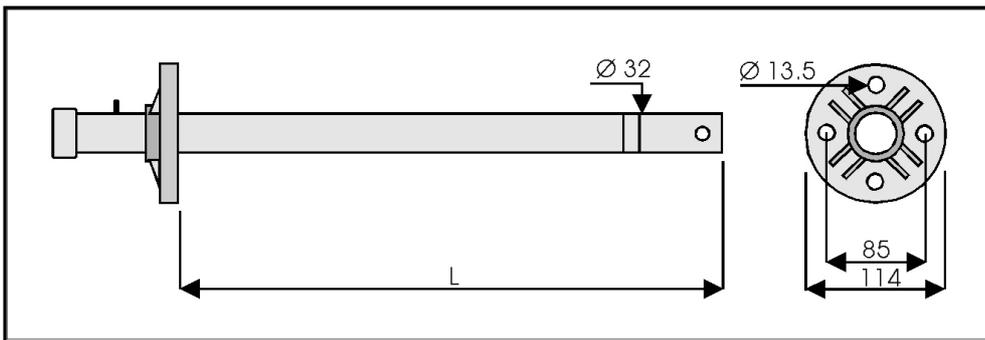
SI/32 IMMERSION PROBE OVERALL DIMENSIONS
